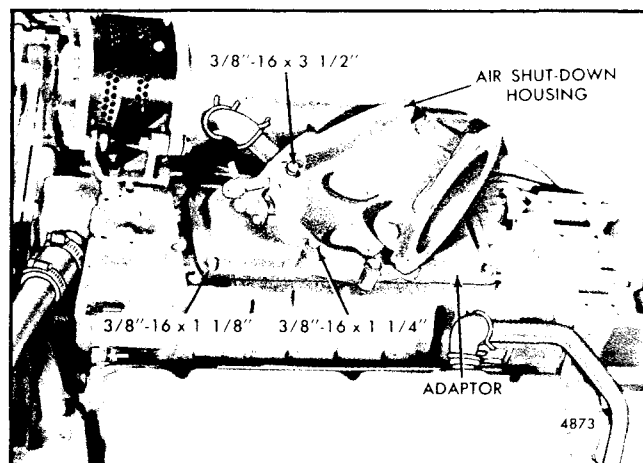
Location of Air Shut-Down Housing and Adaptor Mounting Bolts
